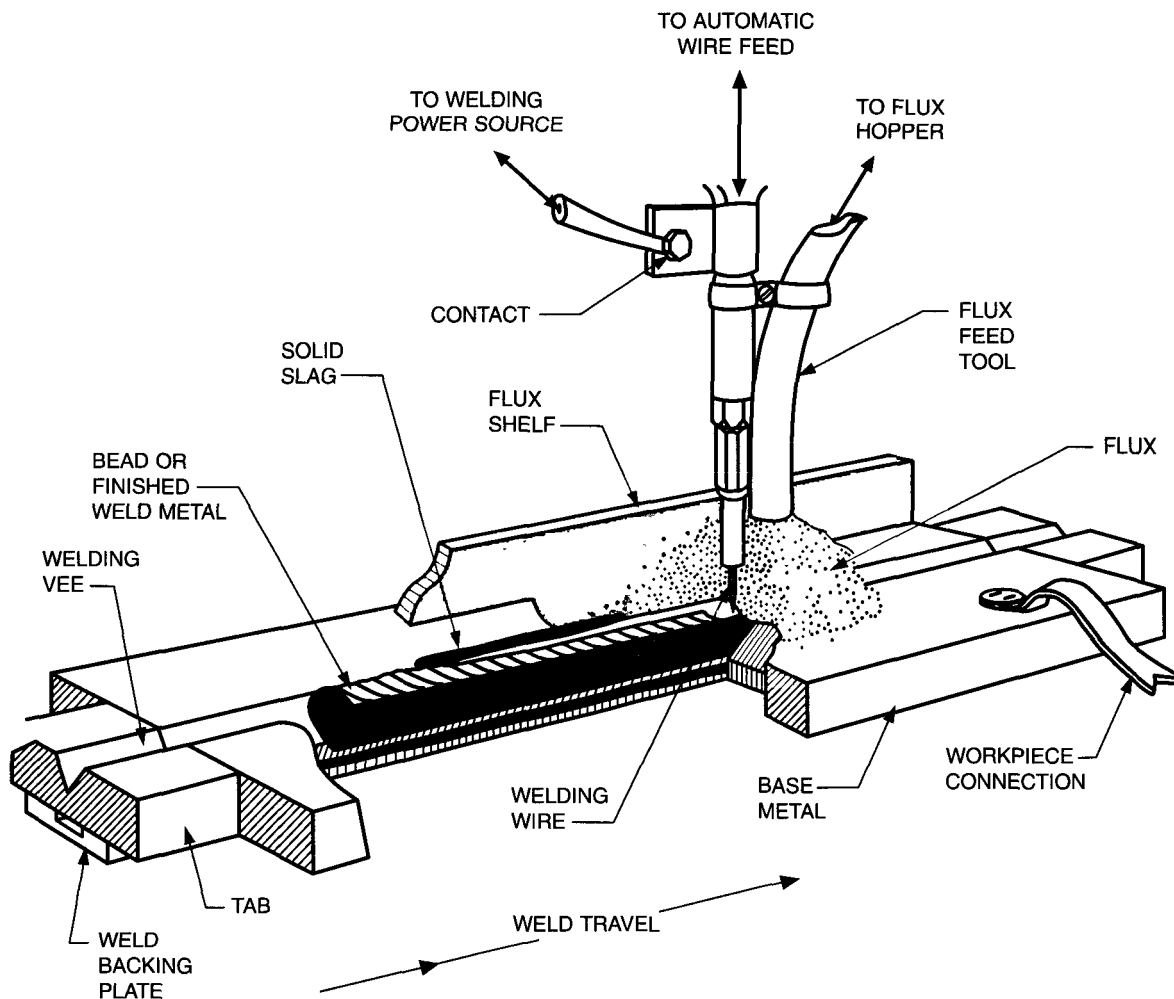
Schematic View of Submerged Arc Welding Process
